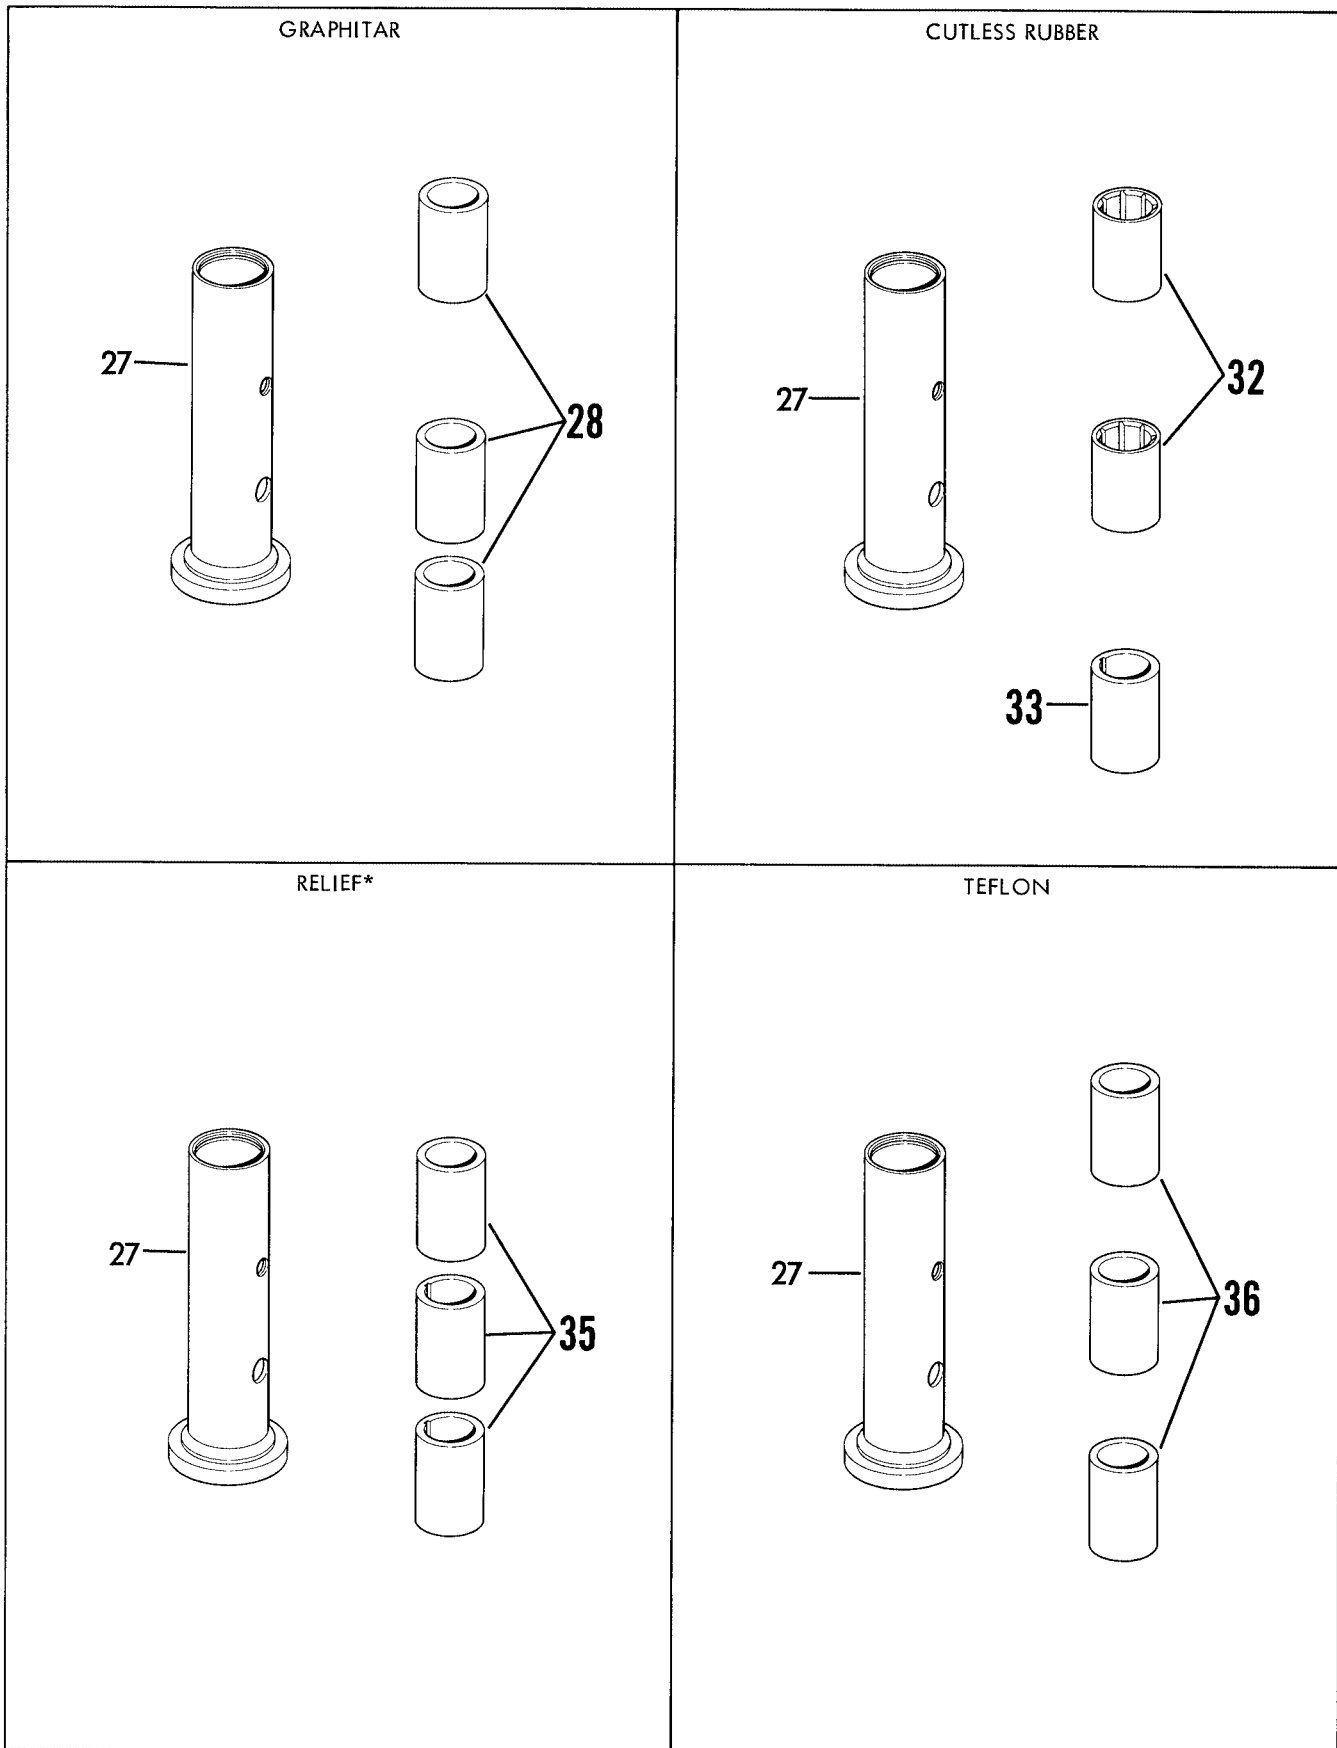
Model 531-532 Exploded View (Sheet 1 of 4)
